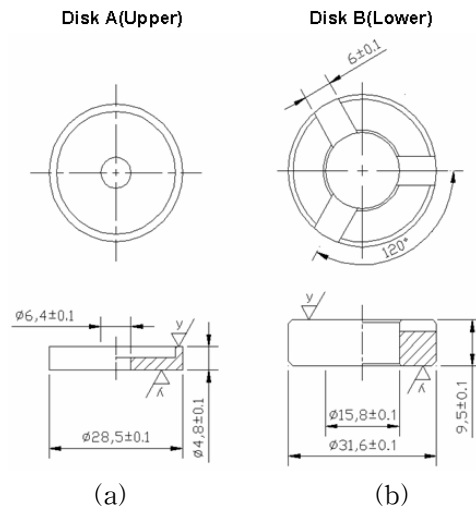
(a) Shape of upper specimen (b) Shape of lower specimen
